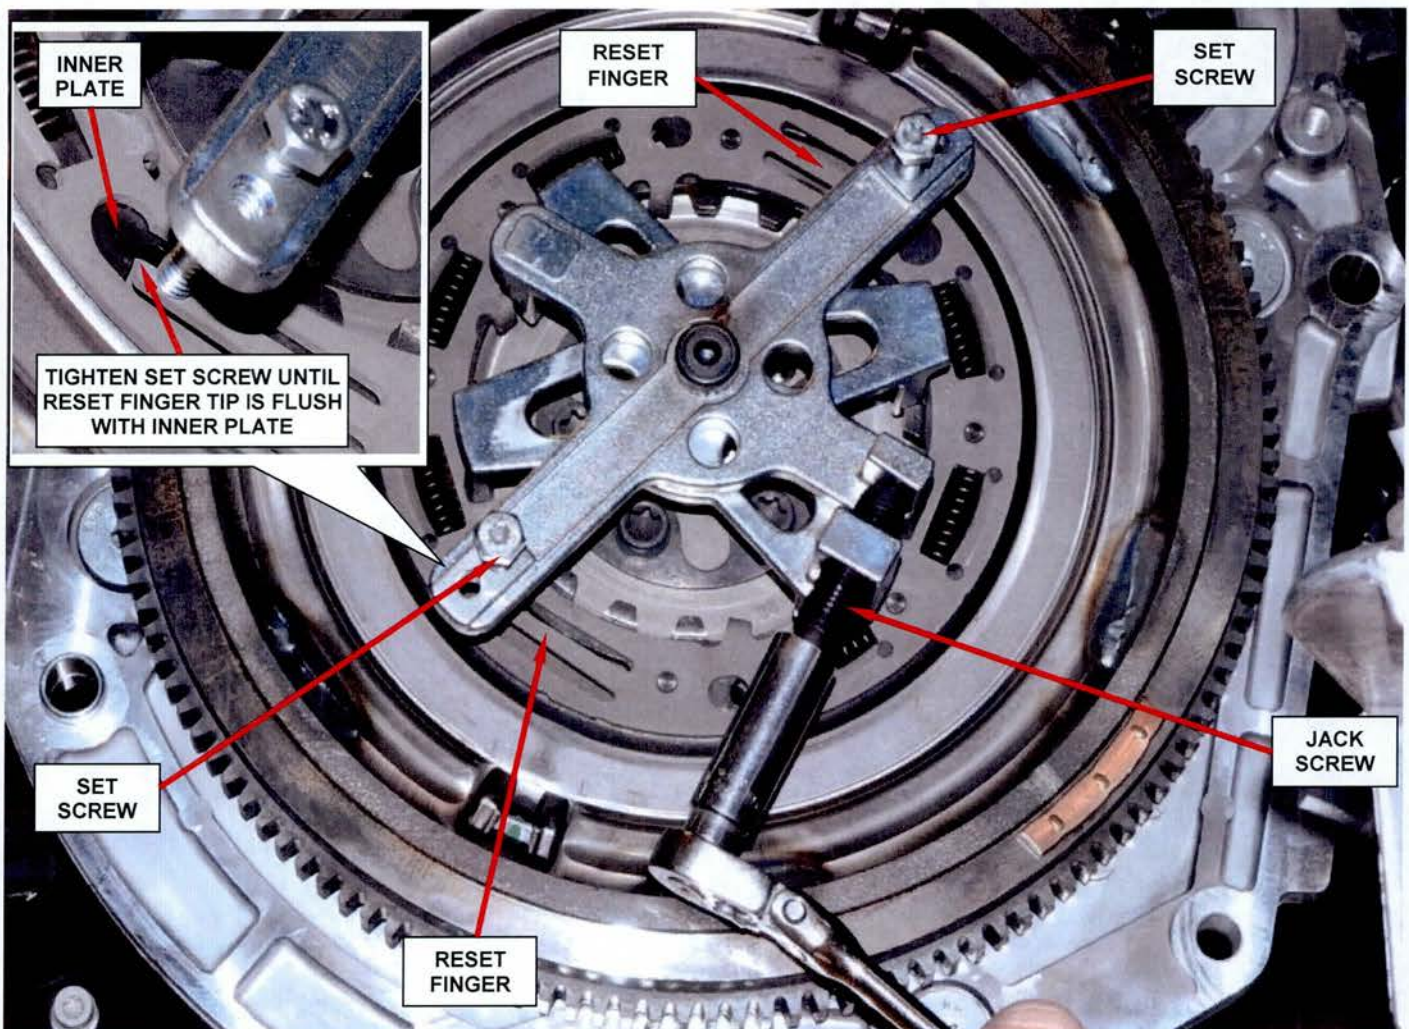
Tighten Jack Screw until Reset Fingers are Over the Slot on the Inner Plate
